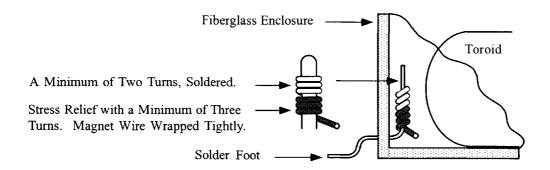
Typical, Solder Terminal on a Surface Mount Device.
